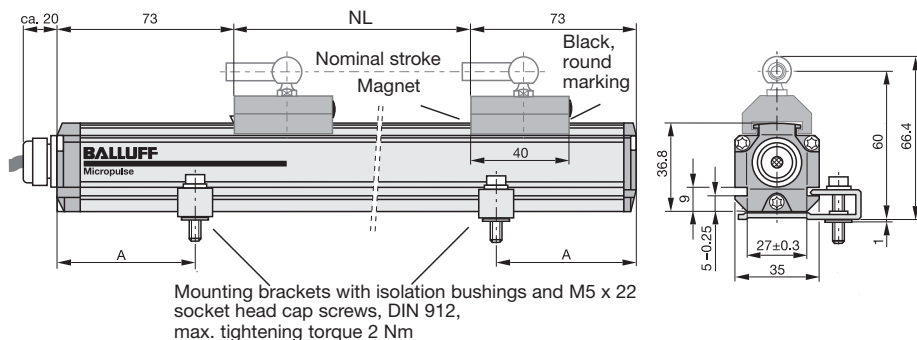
Dimensional drawing (BTL5...P-KA transducer with captive magnet BTL5-F-2814-1S)
